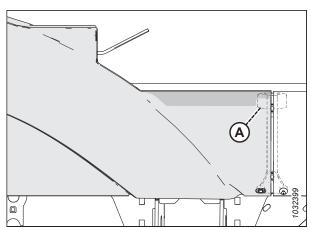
Right Outboard Linkage Cover – View from Rear of Header
